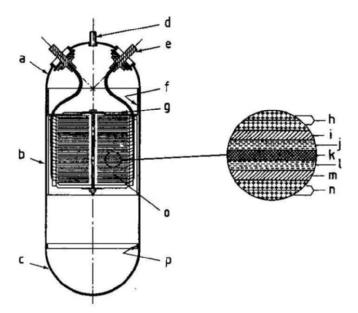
Construction of a nickel oxide-hydrogen cell, showing details of the cell construction. a) Container top hemisphere; b) Container cylindrical section; c) Container bottom hemisphere; d) Filling tube; e) Terminal; f) Welding ring; g) Pressure plate; h) Positive electrode; i) Separator; j) Negative electrode; k) Gas diffusion screen; l) Negative electrode; m) Separator; n) Position electrode; o) Electrode stack; p) Welding ring. Reproduced from Reference 38, Copyright (1985), with permission from Wiley-VCH.
